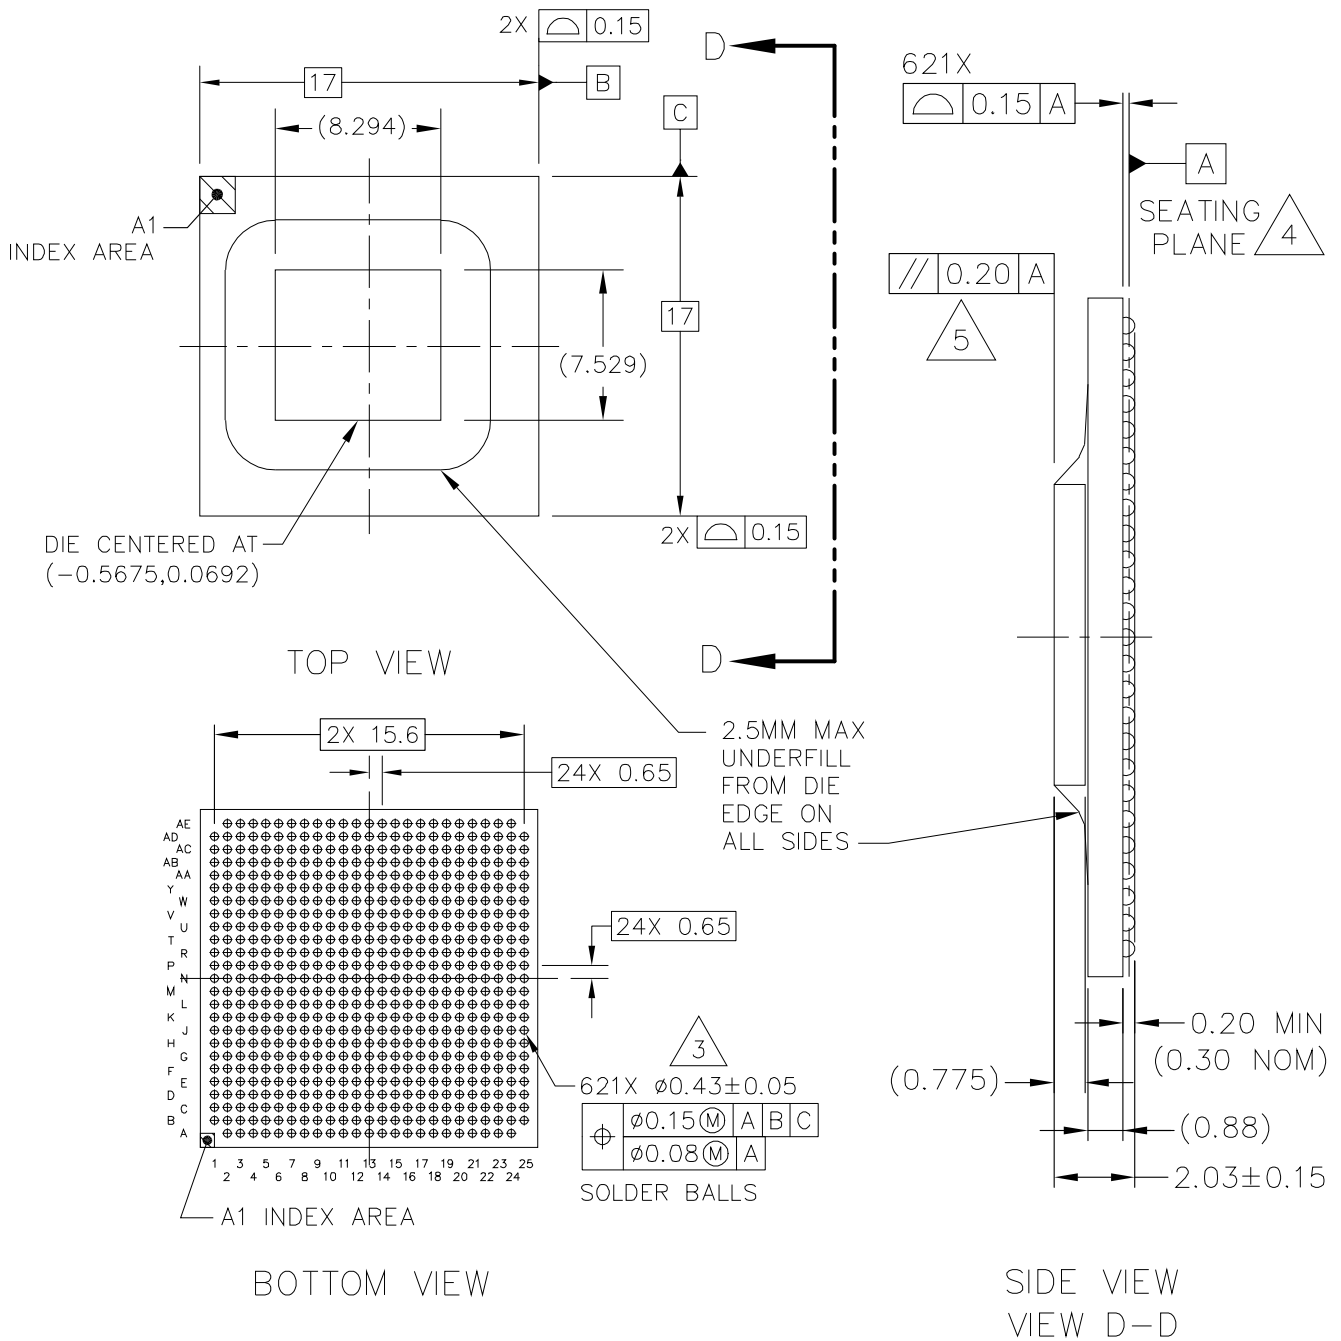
17 x 17 mm BGA, package top, bottom, and side Views
